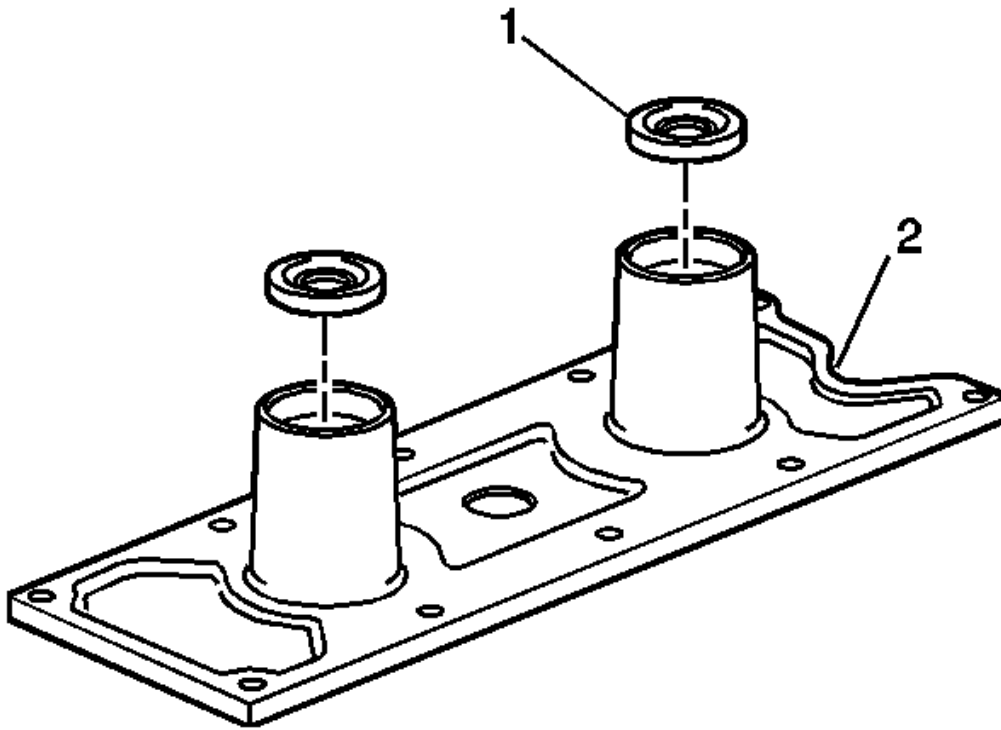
View Of Knock Sensor Oil Seals & Cover
